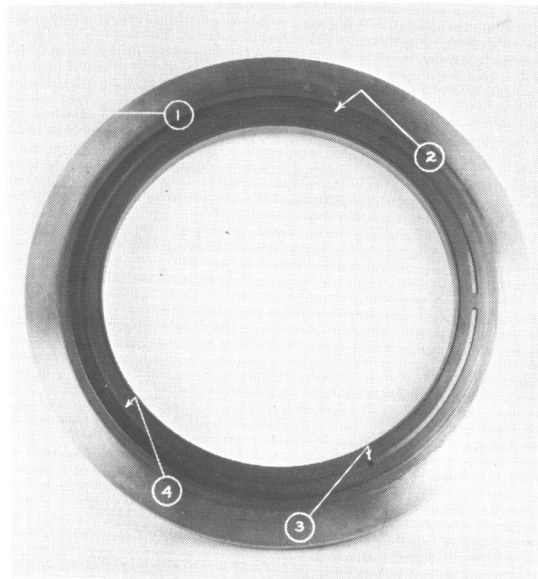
Mainshaft Seal Rig 29360 B - Build 1. Stein Seal Company Orifice Compensating Hydrostatic Carbon Seal Ring Assembly. Note: 1. Carbon Carrier Band. 2. Carbon Seal Ring. 3. Orifice Vent to Seal Face. 4. Annulus. XP-66915
